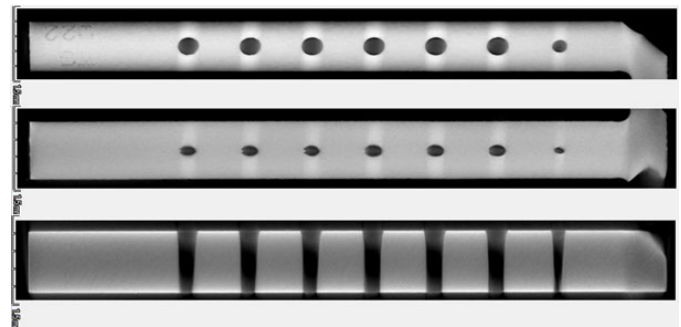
CT scan of $\varnothing 0.3\ \text{mm}$ holes drilled in 1 mm thick plates: (top) entry holes, (middle) exit holes, (bottom) cross section, (right) hole of $\varnothing 0.2\ \text{mm}$.
